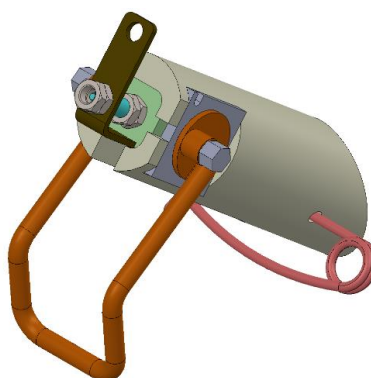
Latch Bar Locking Tool inserted in the Round Block to lock the Latch Bar.
